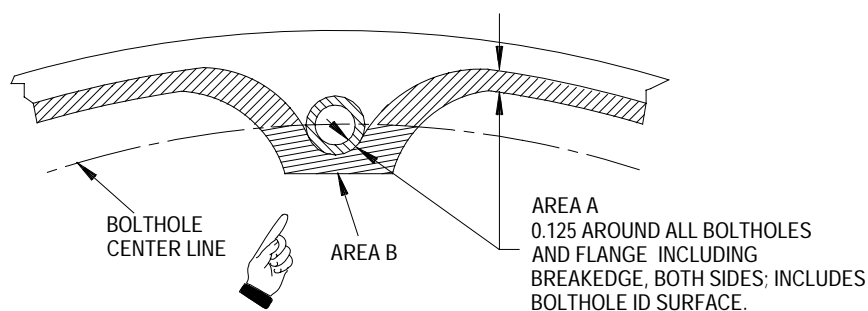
Diffuser Case Assembly - Inspection (Sheet 1 of 5)
